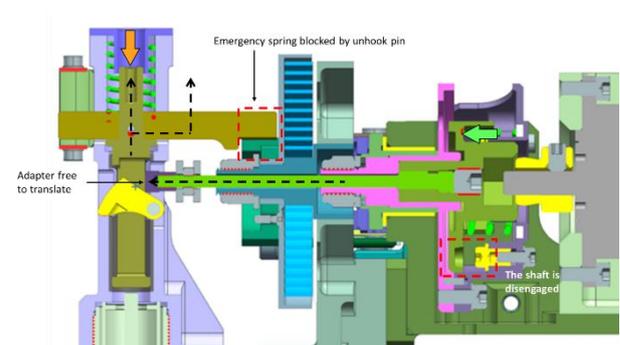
Gearmotor shaft decoupling. The dashed arrows indicate the direction of movement of the parts
